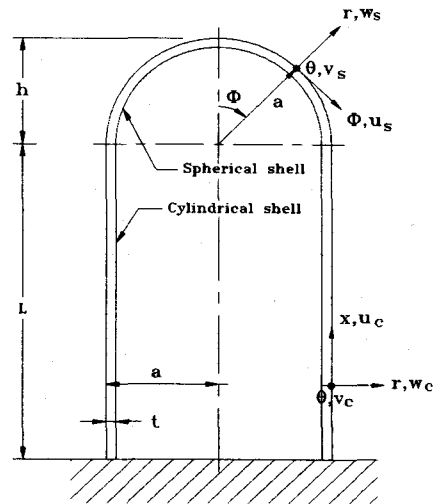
Geometry and coordinate system of the scroll compressor housing shell
